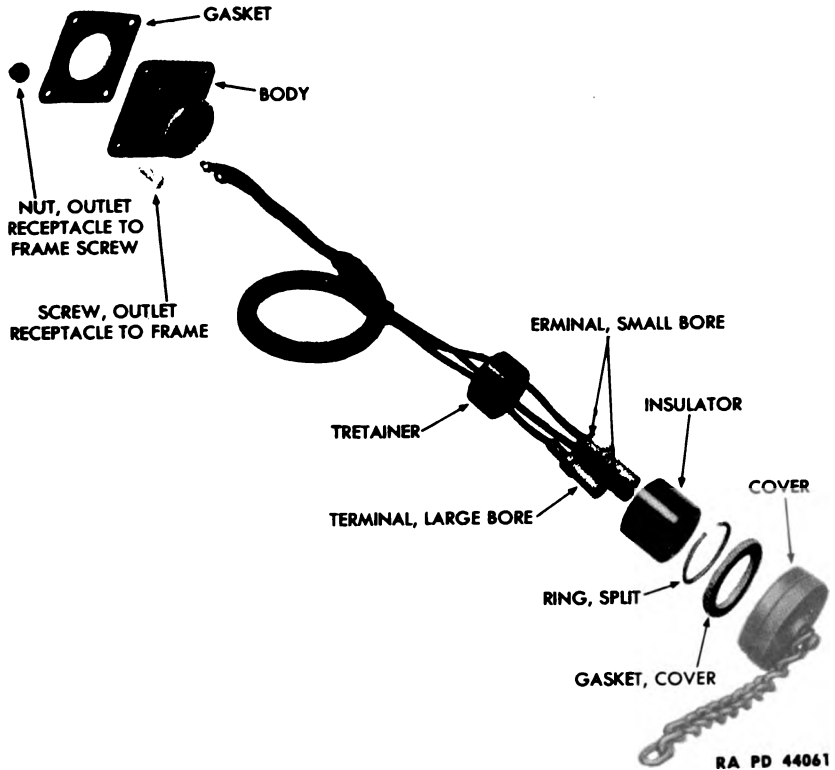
3-pole Outlet Receptacle Assembly — Exploded View
